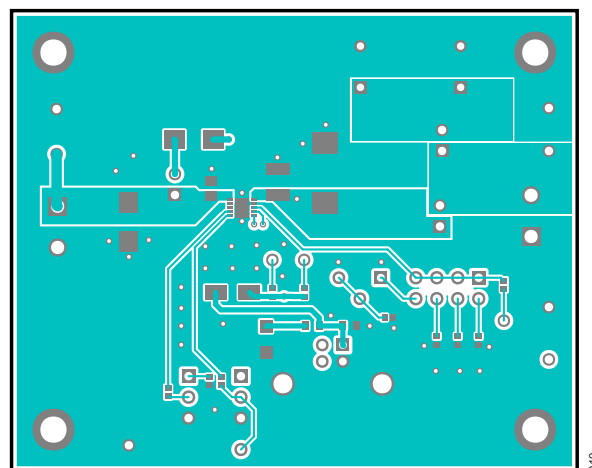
ADPL86612 EV Kit PCB Layout—Top Layer
